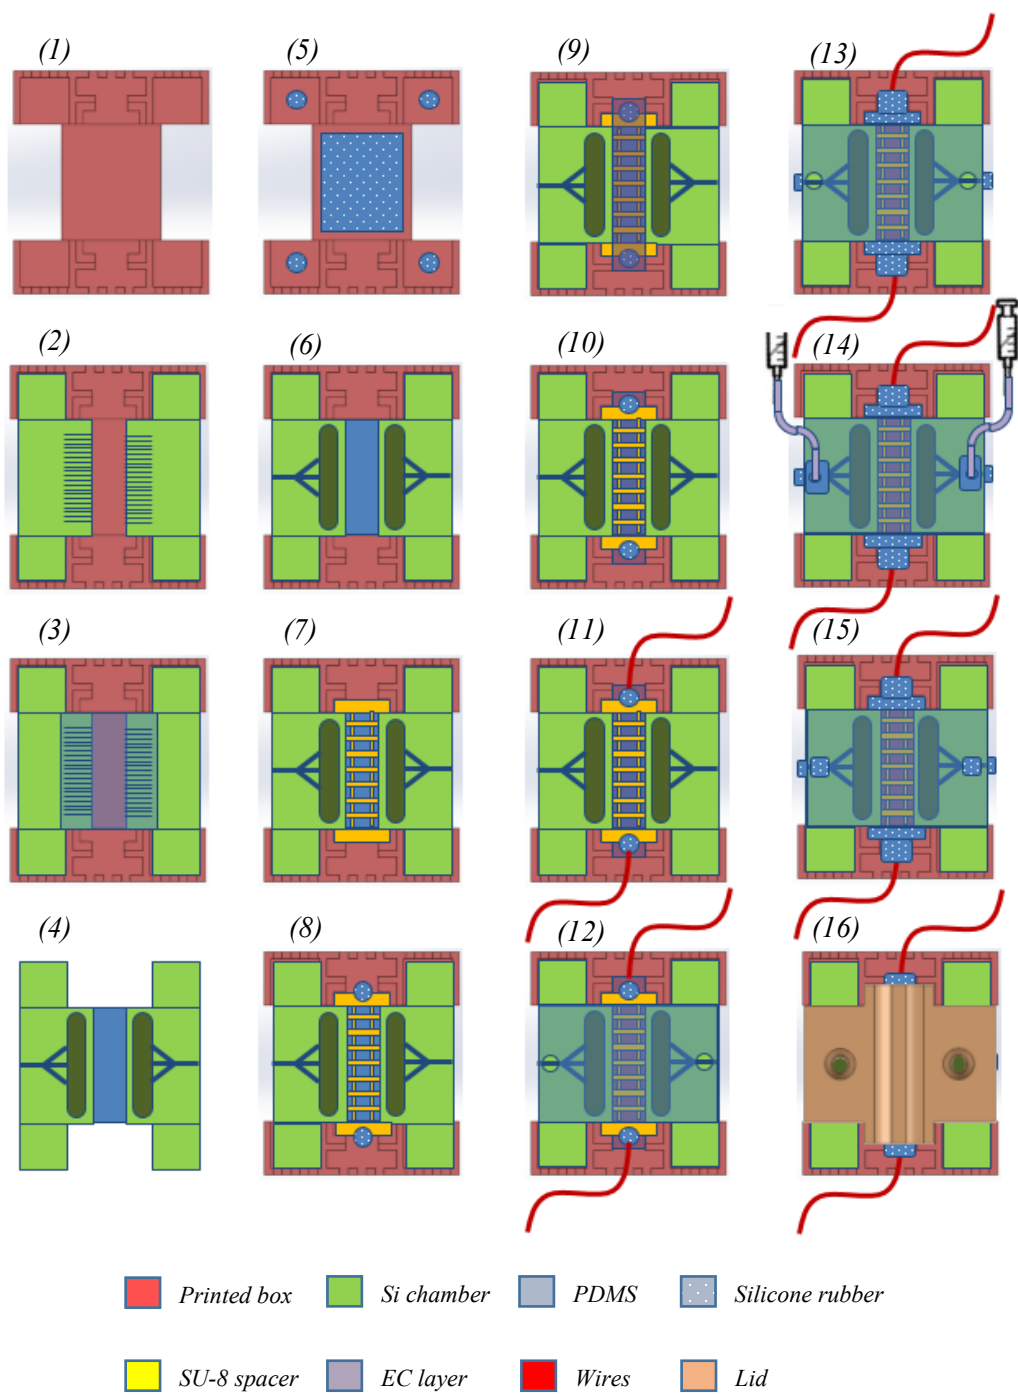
Micro-cooler assembly process flow. (1) 3D-printed package. (2) Place two chambers upside down in the package. (3) Attach bottom PDMS sealing layer on the bottom of two chambers. (4) Take two chambers with PDMS layer out of package. (5) Drop liquid PDMS in the package (center and four corners). (6) Put chambers back in the package. (7) Place SU-8 spacer in the package. (8) Drop liquid PDMS to fix SU-8 spacer. (9) Place EC polymer on the SU-8 spacer. (10) Use liquid PDMS to fix the EC polymer. Repeat (7) and (10). (11) Connect the wires. (12) Attach the top sealing PDMS layer with feeding holes. (13) Drop liquid PDMS and silicone rubber to seal the chambers except for the feeding holes. (14) Inject liquid into the chamber through the feeding holes. (15) Seal the feeding holes with liquid PDMS. (16) Attach lid.
